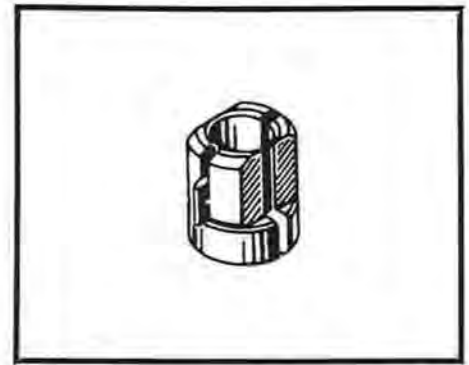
Unlocking roller and jewel must extend out far enough to engage trip spring.
